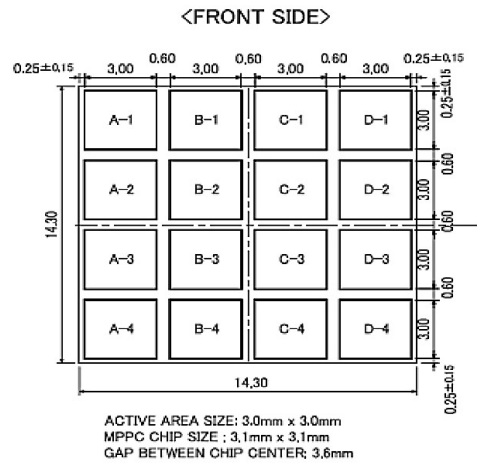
The drawing of the MPPC array (S12643-050CN) and its dimension description. Picture is taken from [56].
